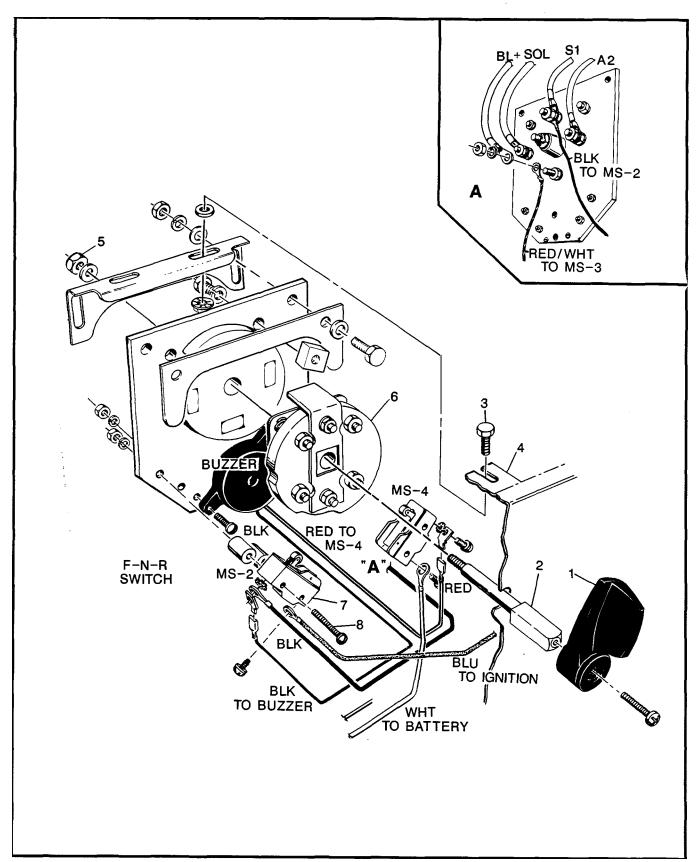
FORWARD-NEUTRAL-REVERSE SWITCH ASSEMBLY
